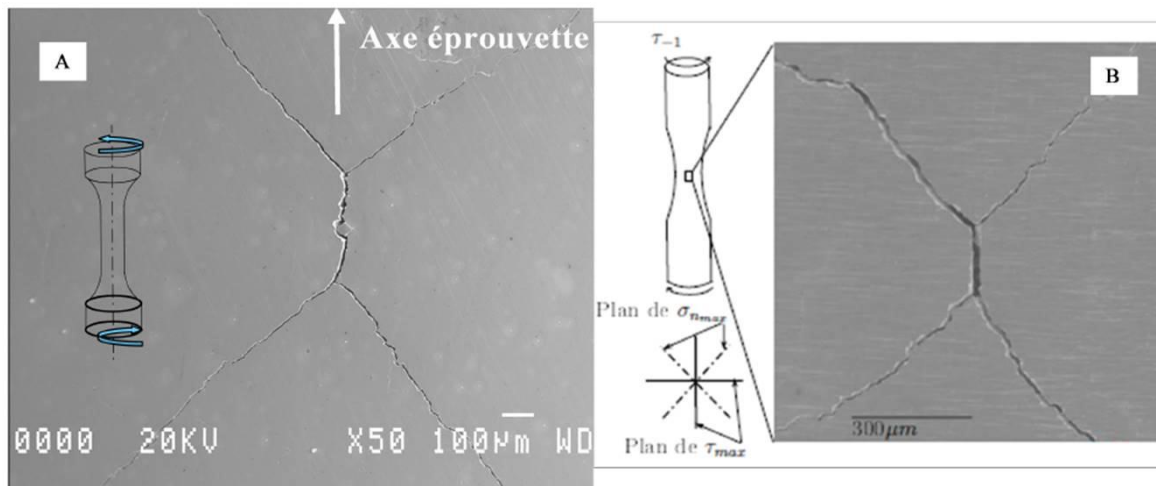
Representative fatigue crack path under torsion loading
